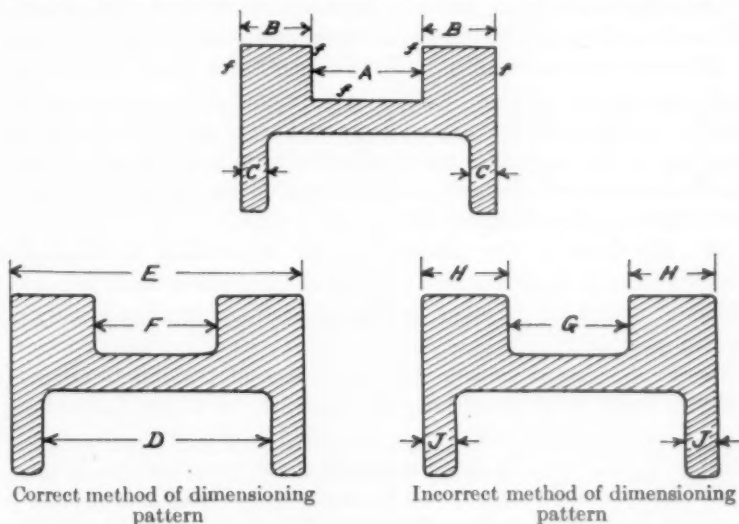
ARRANGEMENT OF PATTERN DIMENSIONS
